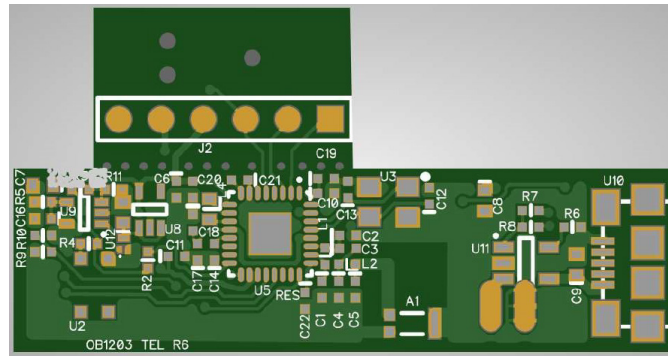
PCB Bottom with Telink Chip Left of the Middle
